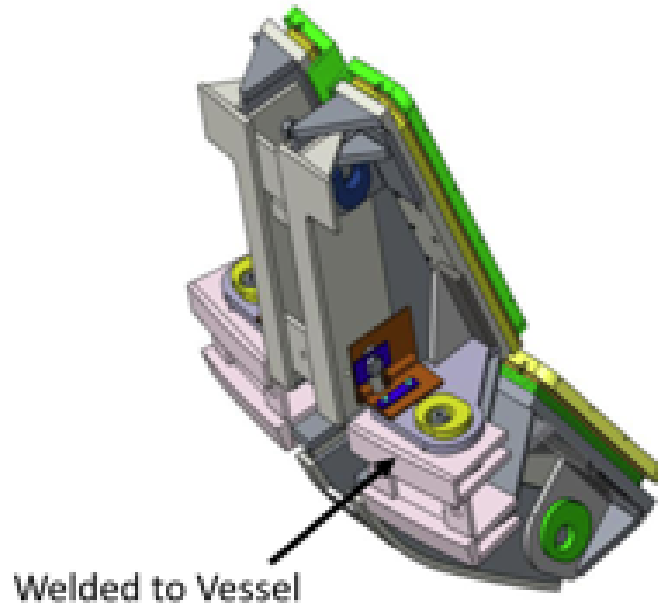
Passive Plate support structure connected to vessel mounting bracket
